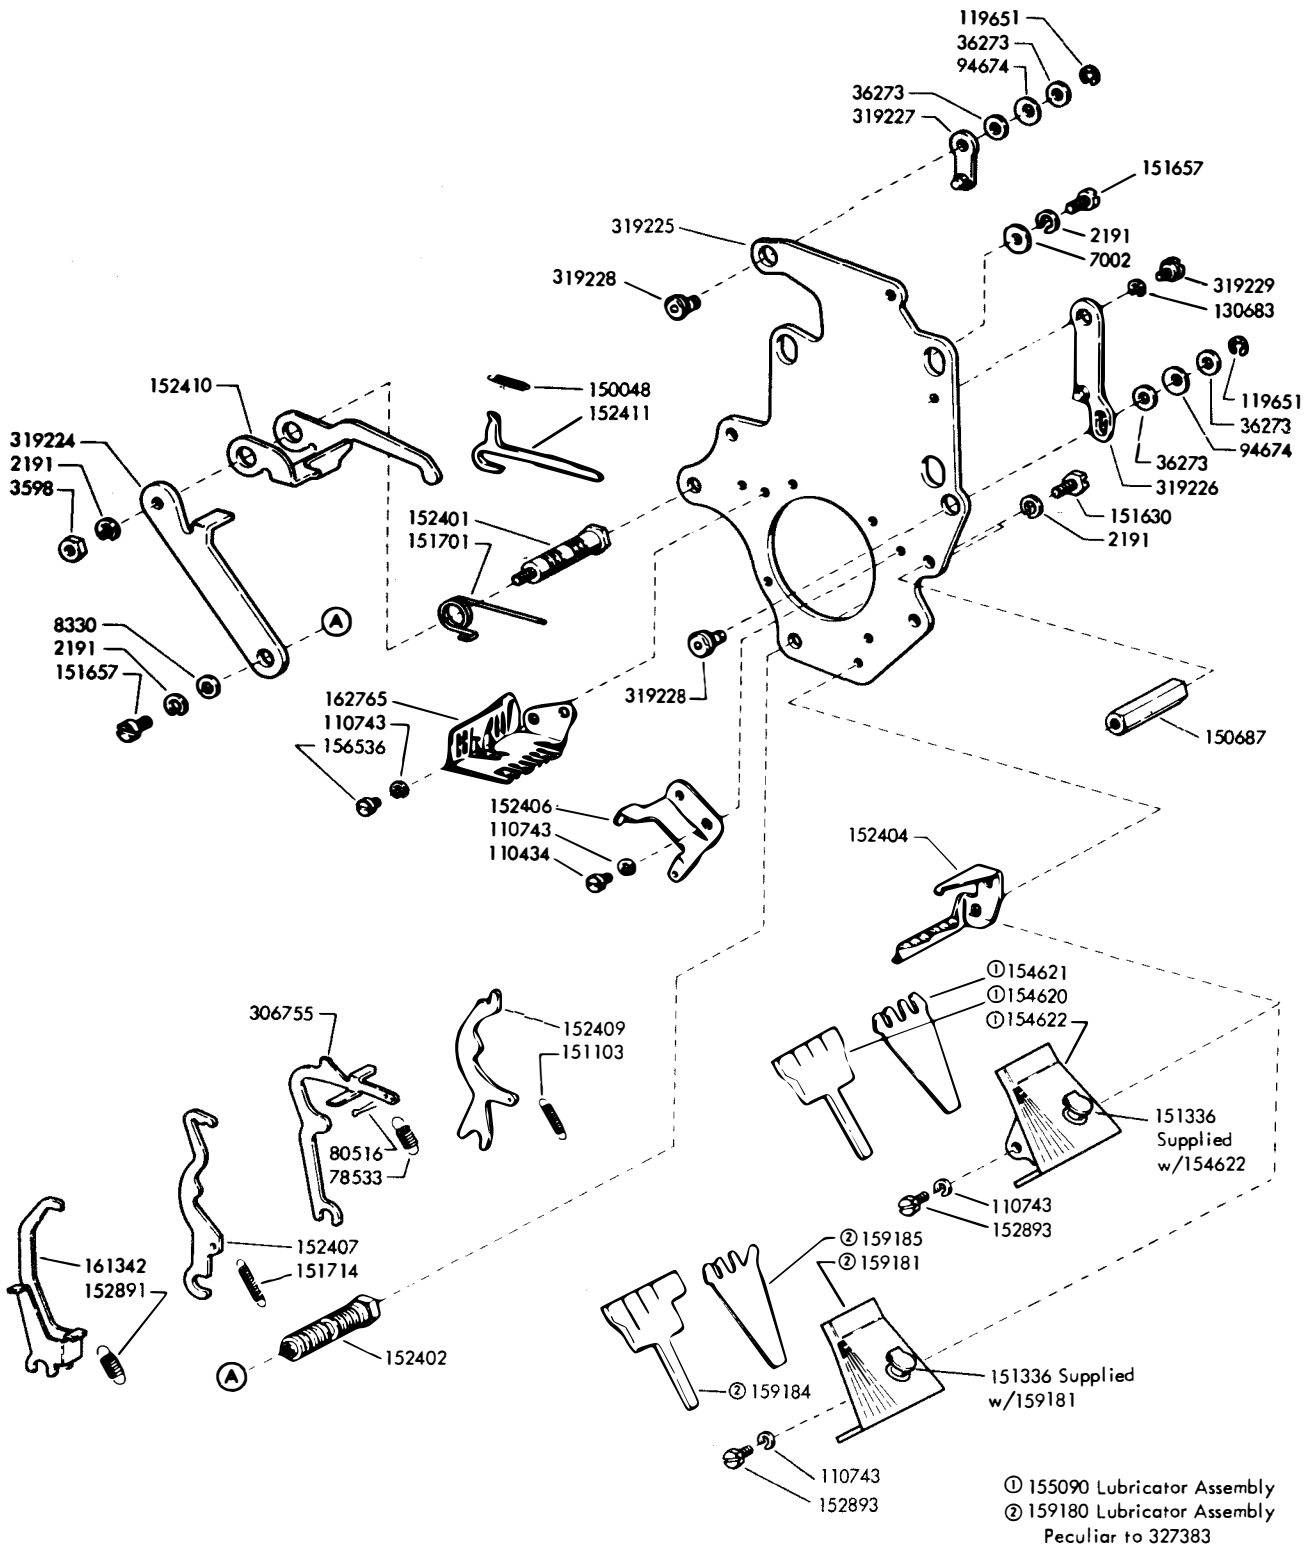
Selector Assemblies 319204 and 327383 - Used on Low-Level Sets (Sheet 1 of 2)
